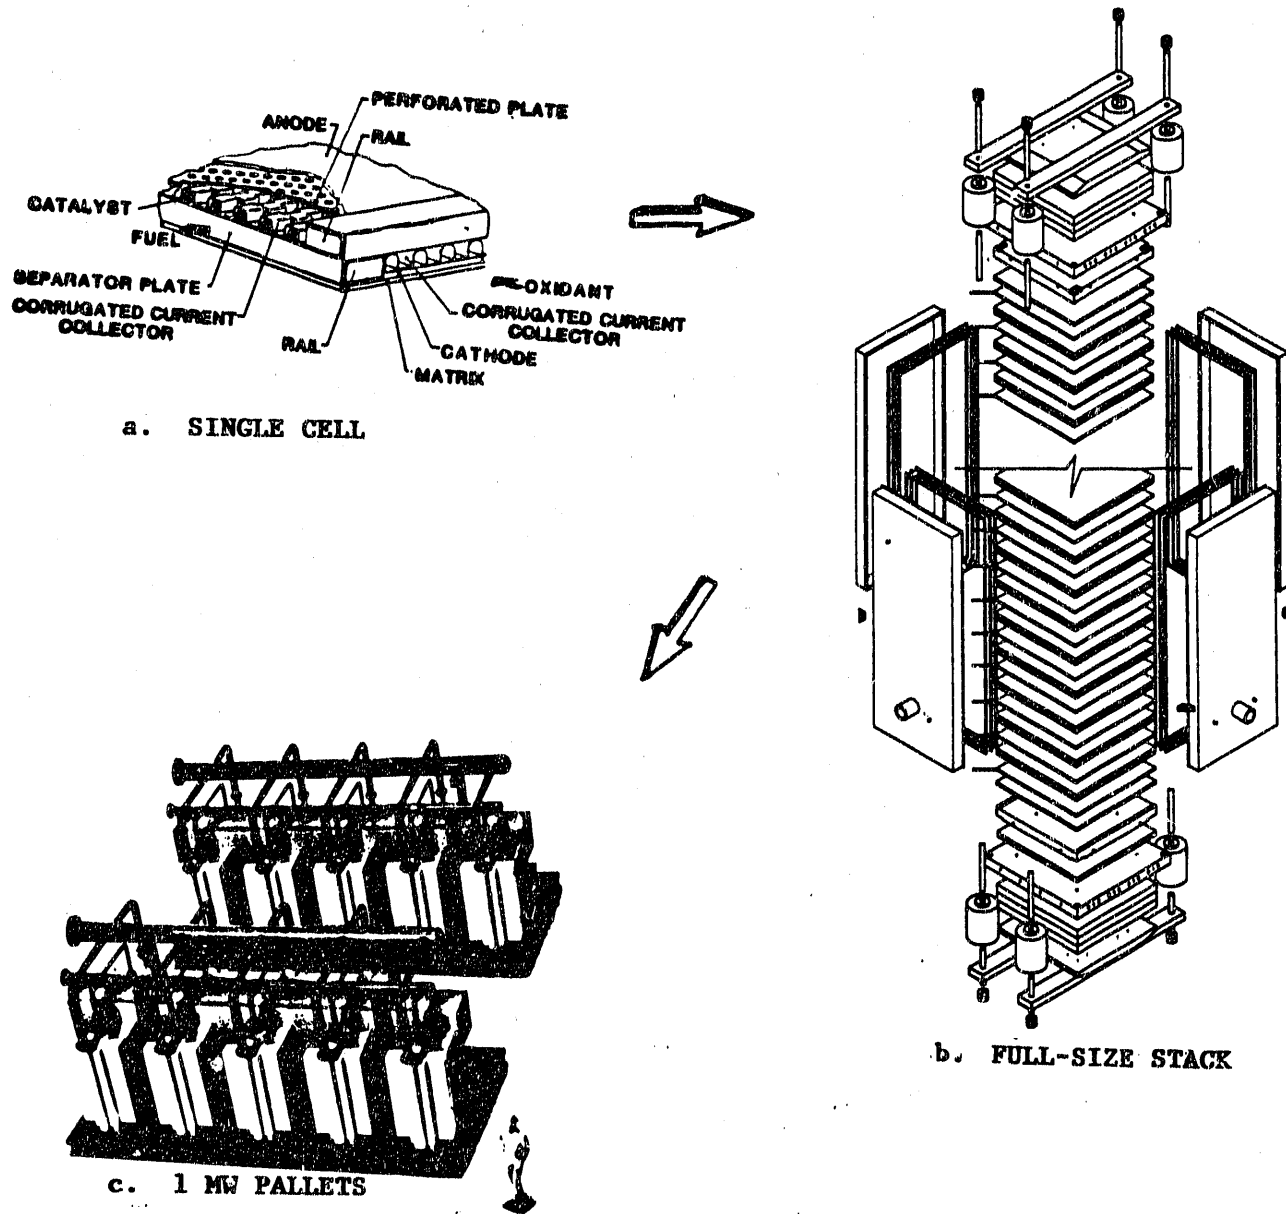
POWER BLOCK ASSEMBLY STEPS:
